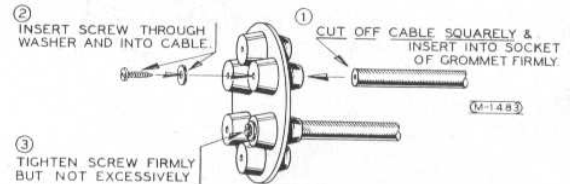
Installation of Cable-Piercing Screw Used With Copper Conductor Cables
